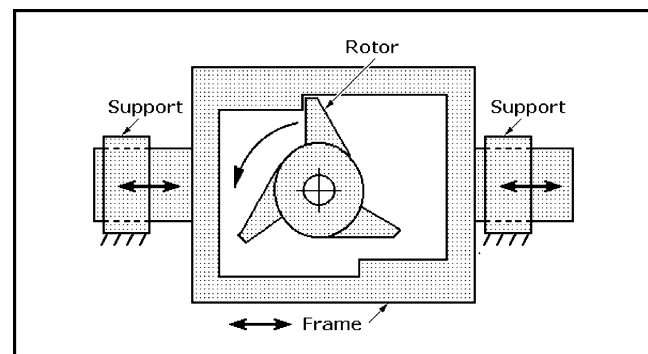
Rotary-to-linear mechanism converts the uniform rotation of the 3-tooth rotor into a reciprocating motion of the frame and supporting bars. The reciprocating cycle is completed 3 times per rotor revolution.
